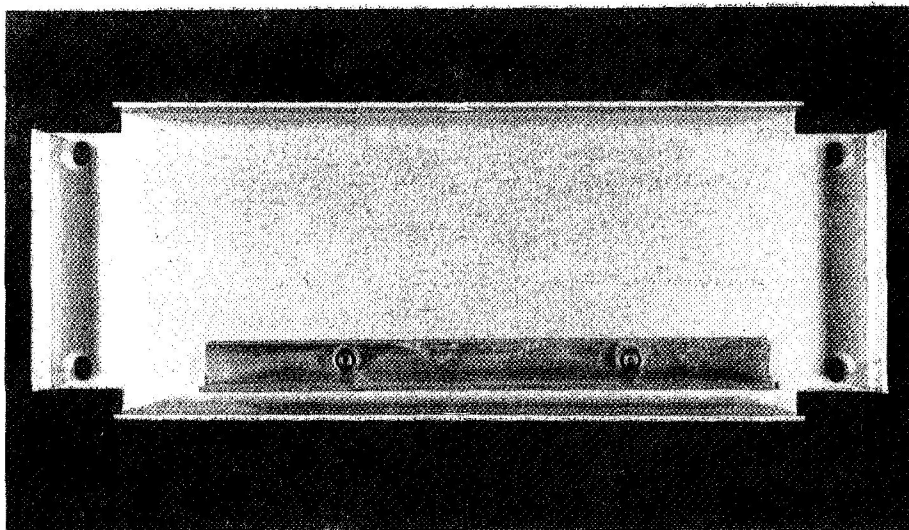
INNER SIDE PANEL WITH BRACKET.
